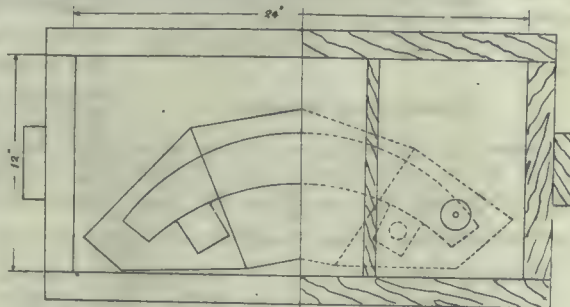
PLAN VIEW OF MOULD SHOWING SLABS OF CORE.
